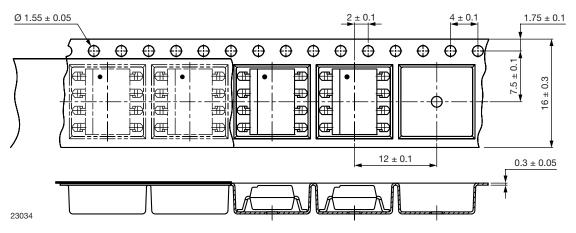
Tape and Reel Packaging (1000 pieces on reel)
